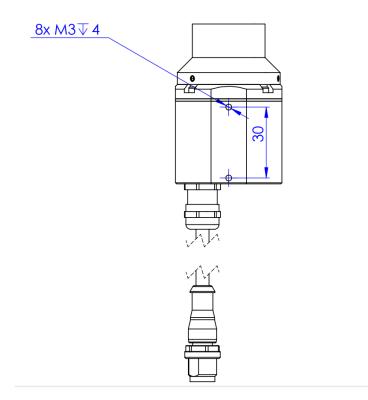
Schematic drawing of the -C variant device with the M3 threaded holes highlighted.
